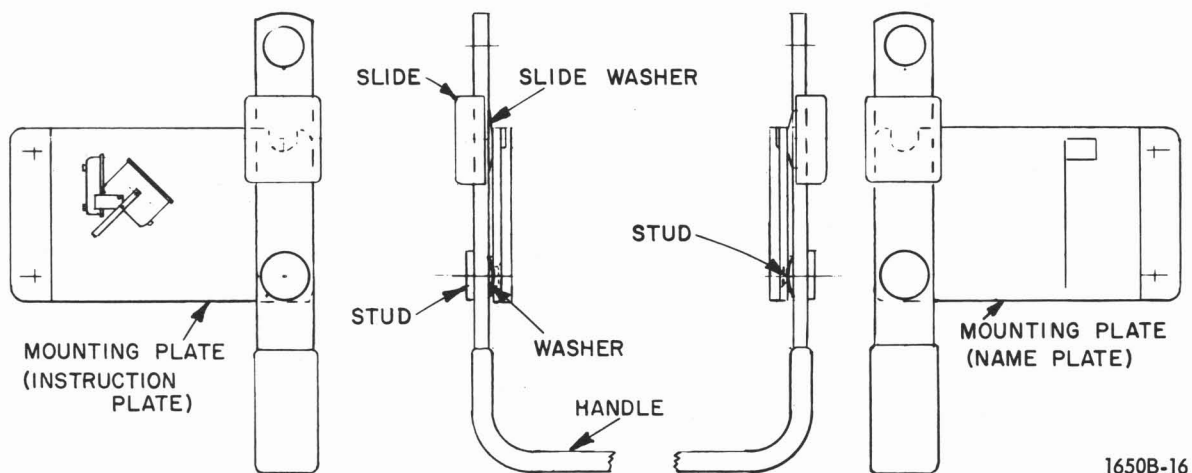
8. Complete handle and mounting plate assembly (P/N 5361-2002).
